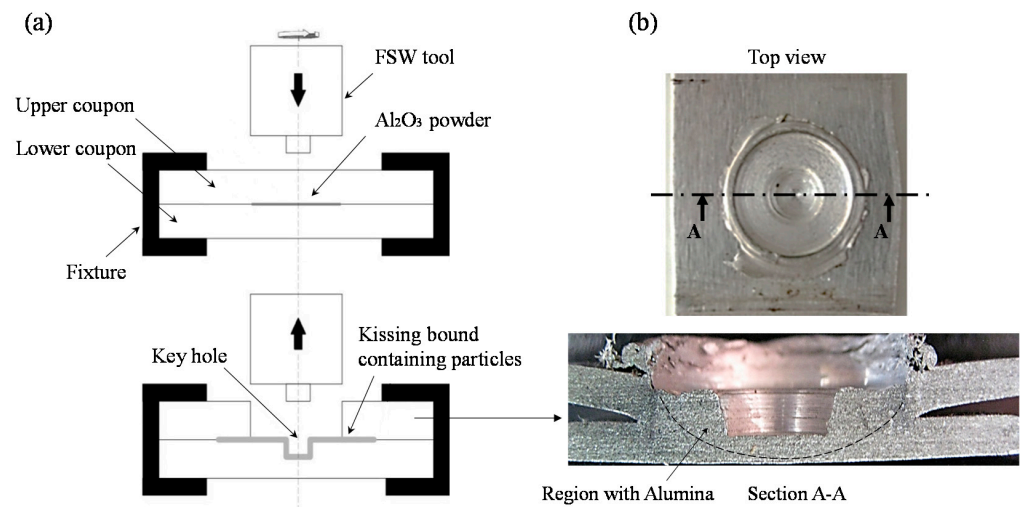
(a) The process of creating MMC through adding alumina powder in the weld nugget of FSSW joints; (b) a typical FSSW joint sample with the A–A cross-sectional view.
